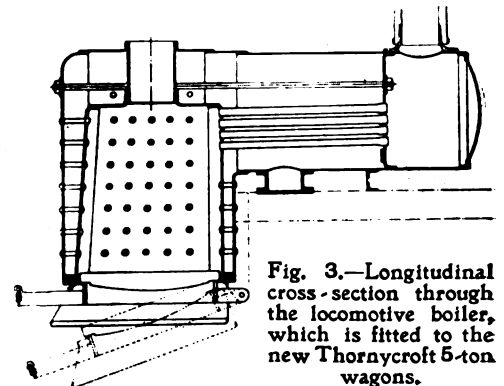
Longitudinal cross-section through the locomotive boiler, which is fitted to the new Thornycroft 5-ton wagons.
